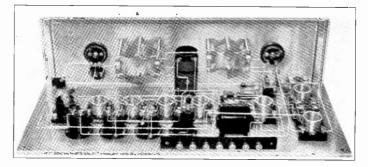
This view shows the wiring and parts arrangement of a battery operated receiver, which is very easy to construct.
